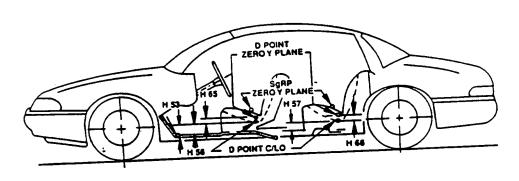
INTERIOR DIMENSIONS, HEIGHT
